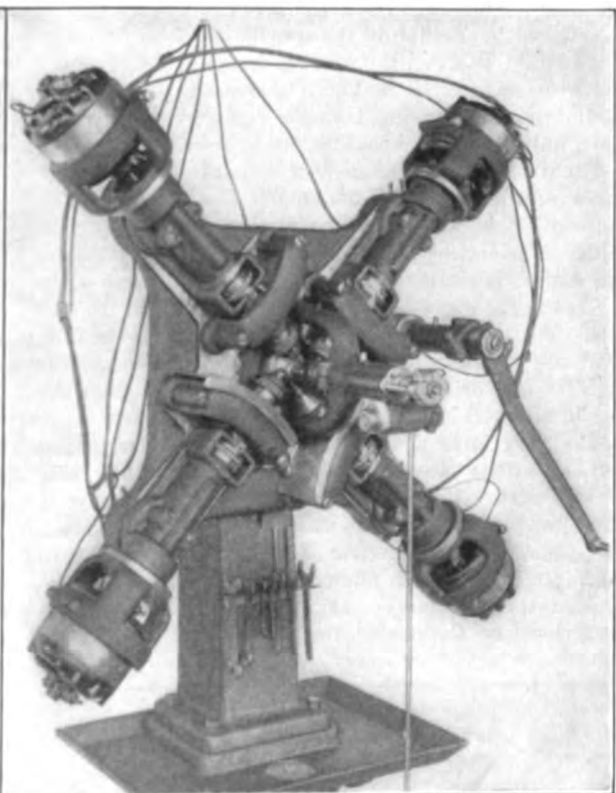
MILLER FOR FOUR WRENCH FLATS
